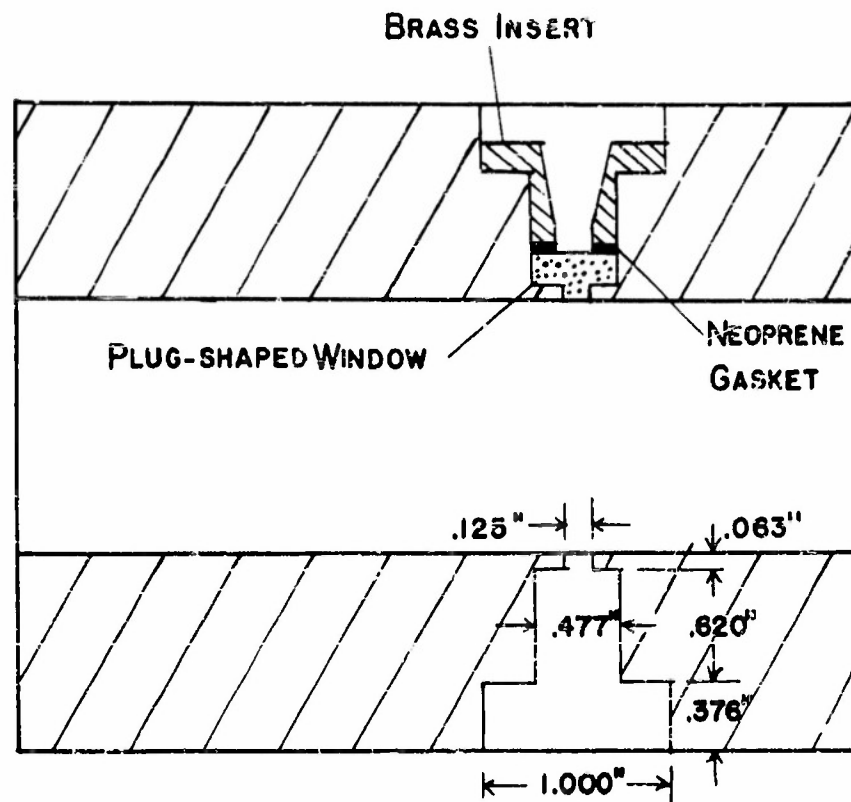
SHOCK TUBE SECTION FOR MOUNTING
